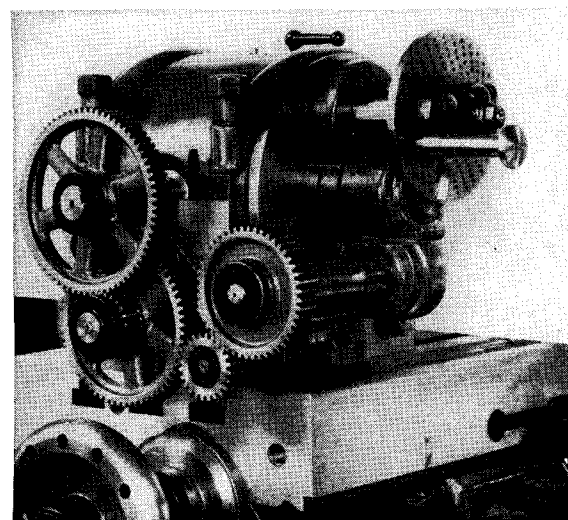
A Brown & Sharpe index head geared for 319 divisions (compound gearing with one idler). (The Brown & Sharpe Manufacturing Company)
